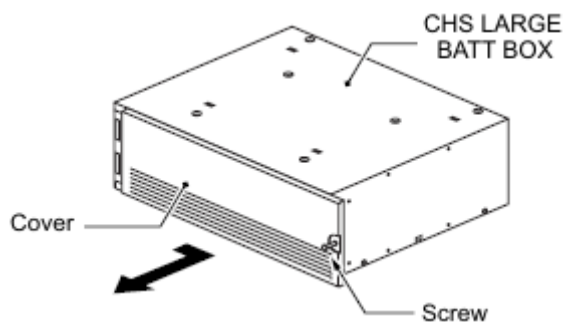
Removing CHS LARGE BATT BOX Cover
